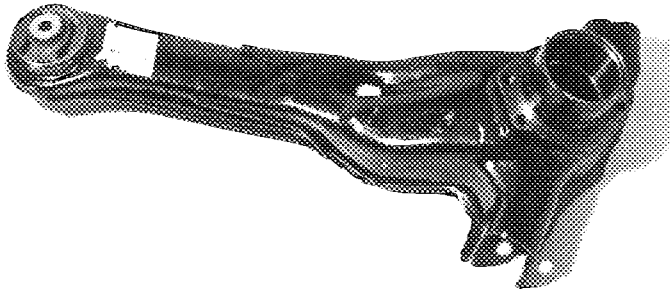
REINFORCED TRAILING ARM TYPE 2
